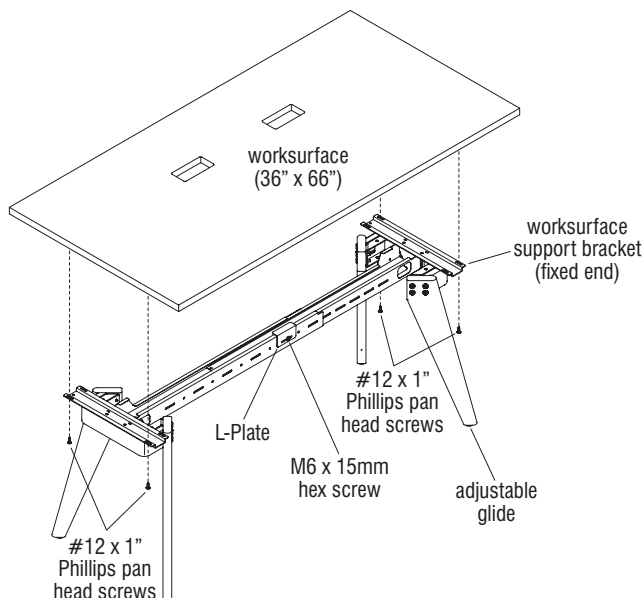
Single Beam Wood Leg Unit - Worksurface Installation
